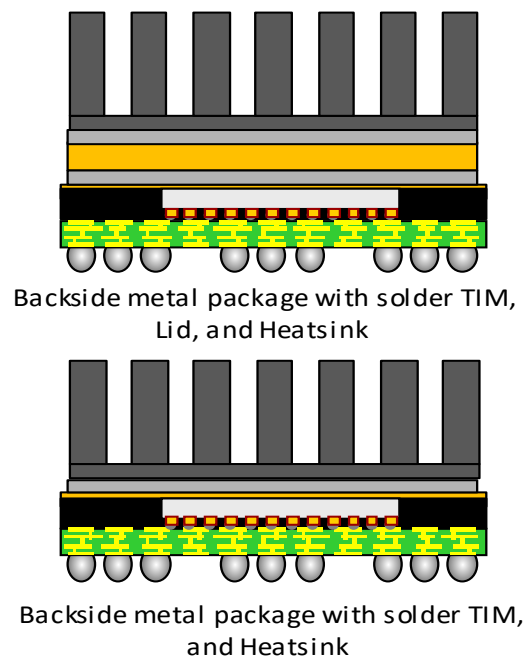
Exposed die molded fcCSP with solder TIMs, Heatsink, and with or without lid
